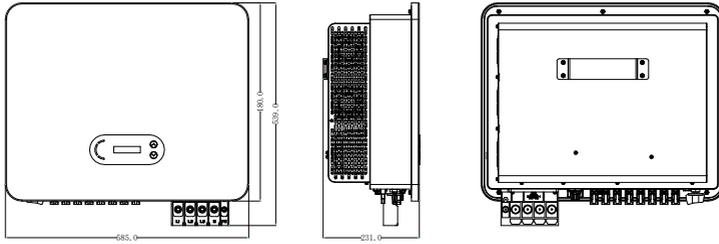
Front, side and back of the machine (take 50KW for example)
